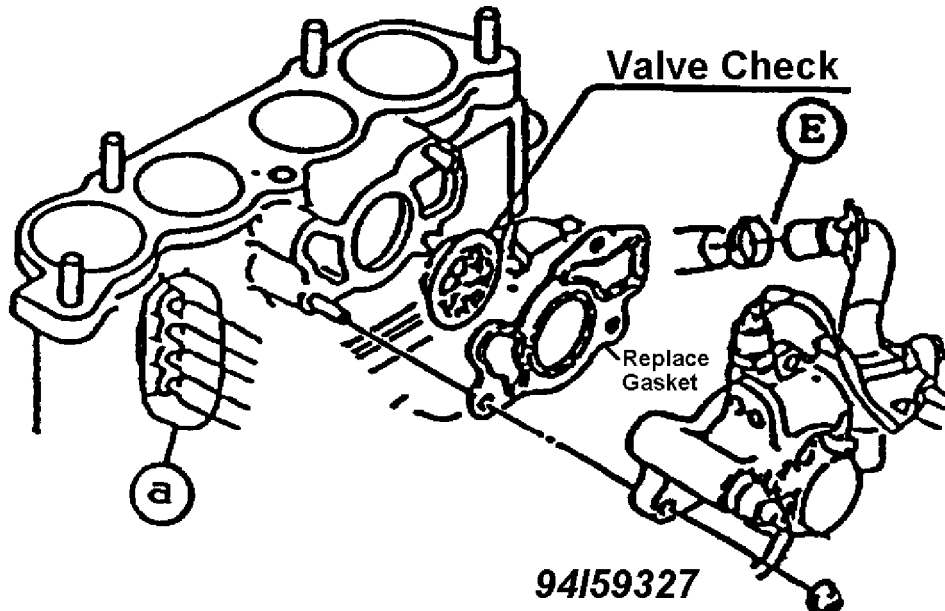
Removal of Relief Air Hose & Vacuum Tubes
